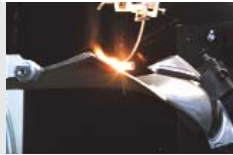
Model test component (shaft-disk) with weld seam
